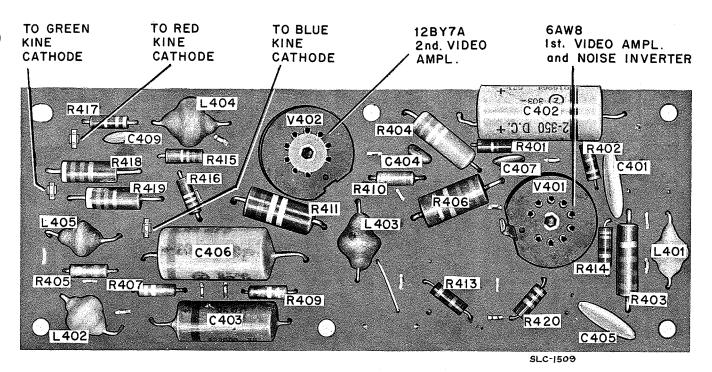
Top View, Printed Circuit Board, PW-400, 1st and 2nd Video, Noise Inverter-CTC5N.
